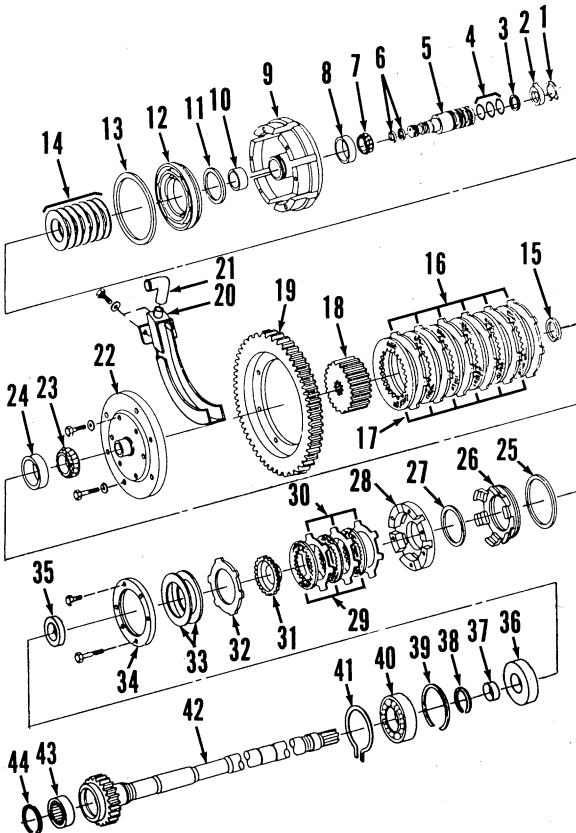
Exploded view of pto clutch and brake assembly used on models equipped with Power Shift transmission. Drive shaft (42) and related components are used on Models 4050, 4250 and 4450 with dual-speed pto.
